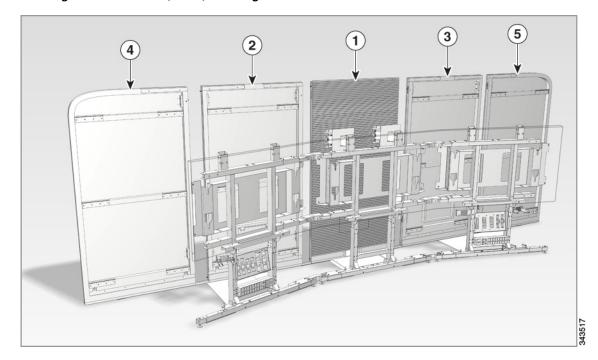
Installing the Wall Frames (2 of 3)—Joining the Locating Dowels with the Holes in the Adjoining Panel
